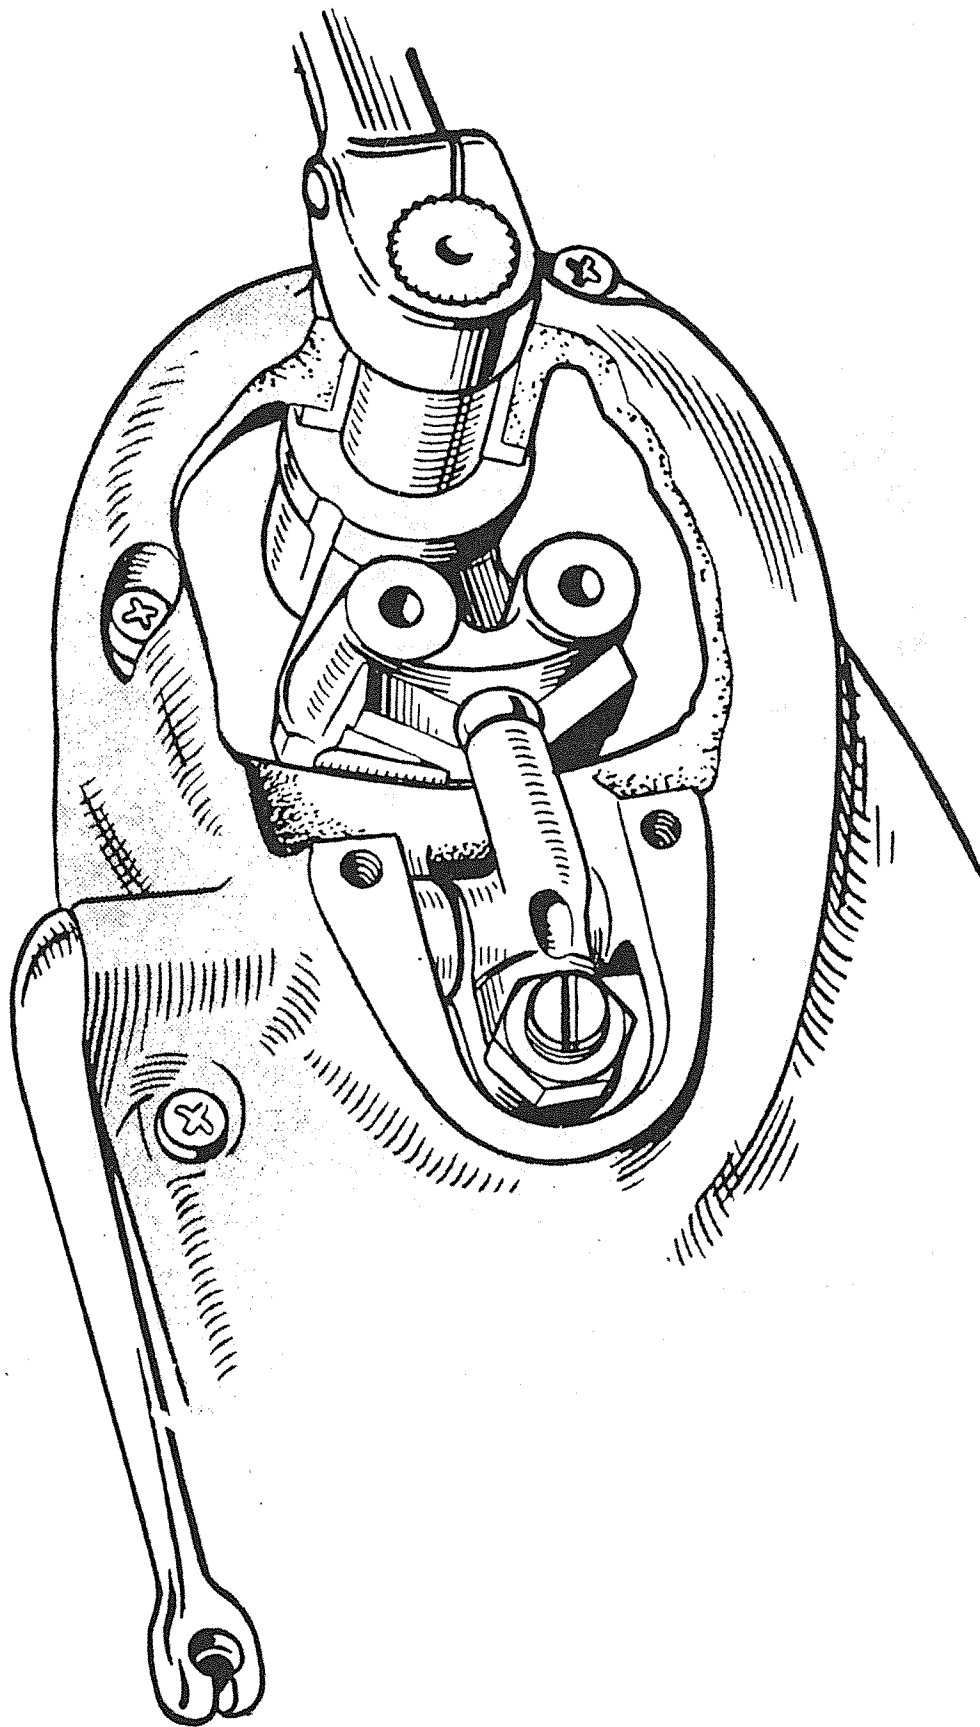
SLICKSHIFT GEARCHANGE MECHANISM.
